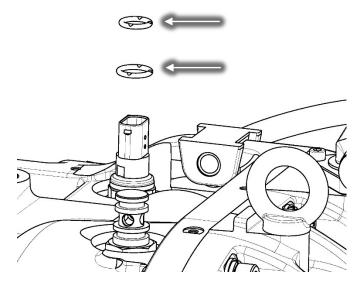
SCR Manifold Brass Fitting O-ring Removal
